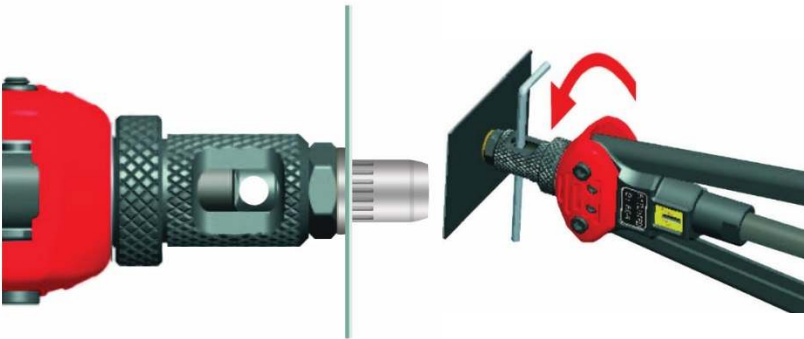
Figure H. Insert an Allen wrench into the hole on the shaft of the mandrel and rotate to release the rivet nut installation tool.
